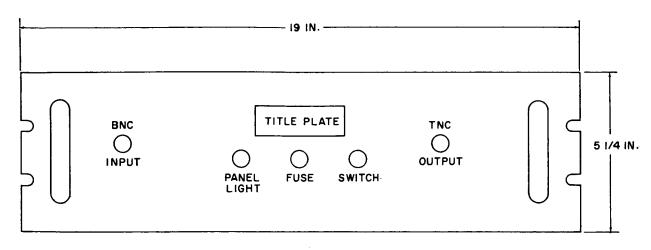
FILTER TYPE HFF-D-5, PANEL OUTLINE
